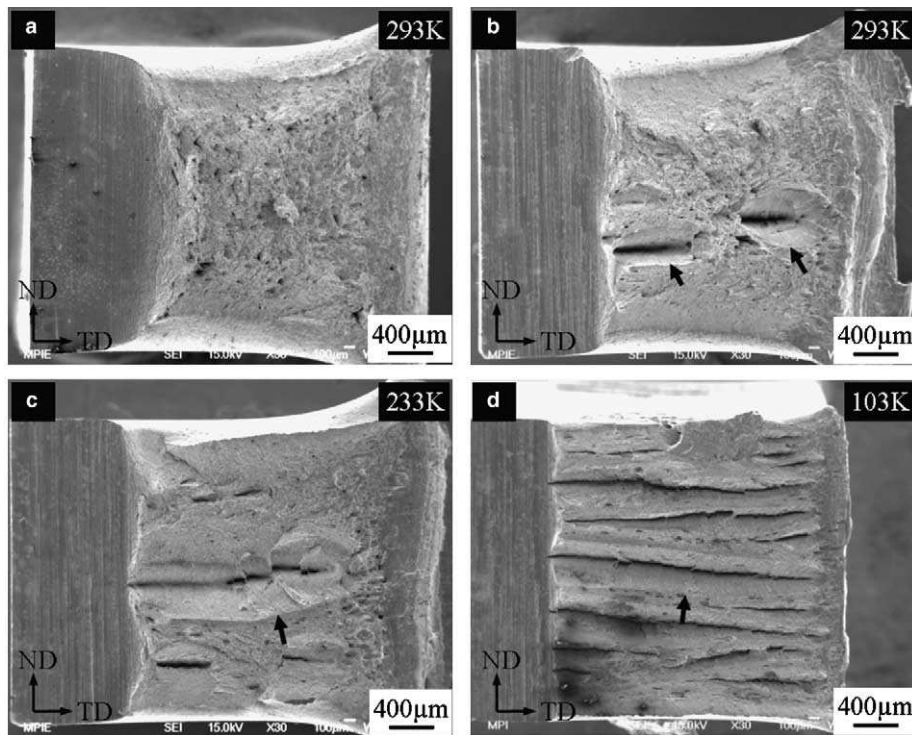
Fracture surfaces of the steels with different ferrite grain sizes after Charpy V-notch impact tests (SEM): (a) Fracture surface of the conventional steel after impact testing at 293 K; (b), (c) and (d) fracture surfaces of the ultrafine grained steel after impact testing at 293, 233 and 103 K, respectively. The black arrows point out material delaminations.
